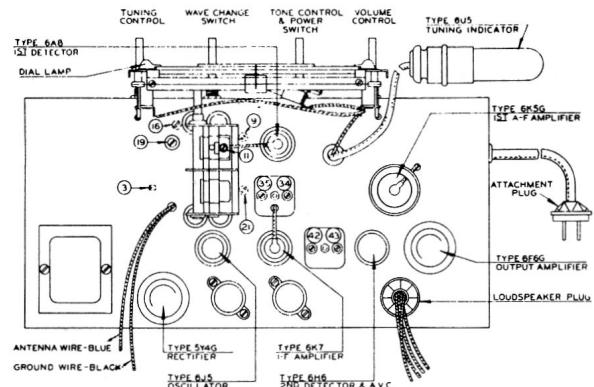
Chassis Layout Showing Controls and Tube Locations—Model 833.
